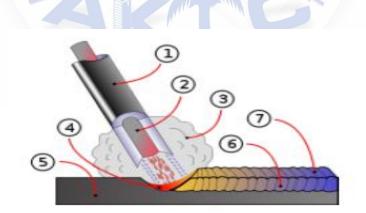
FIGURE- ARC AND WELD IN SHEILDED METAL ARC WELDING
